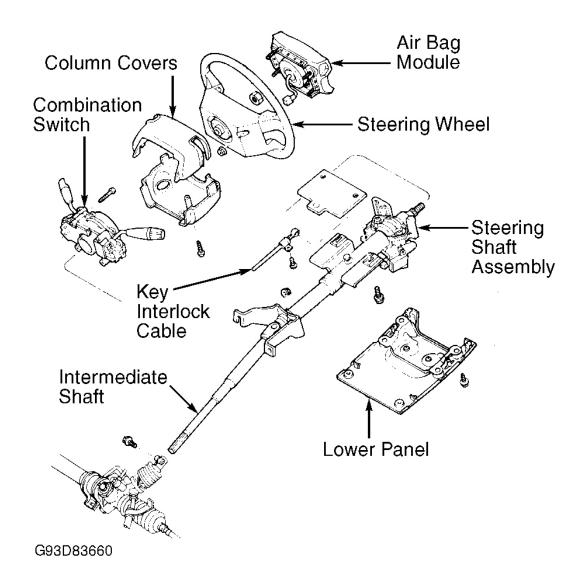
Exploded View Of Steering Column Courtesy of MAZDA MOTORS CORP.
